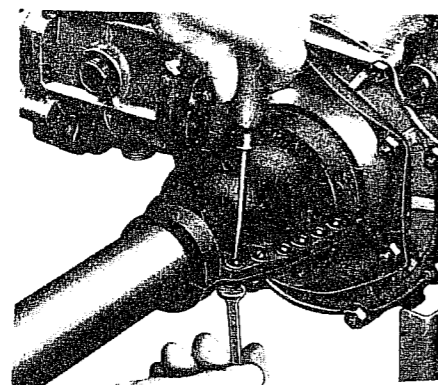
Fitting a split dust sleeve to the axle shaft - Swing axle.
